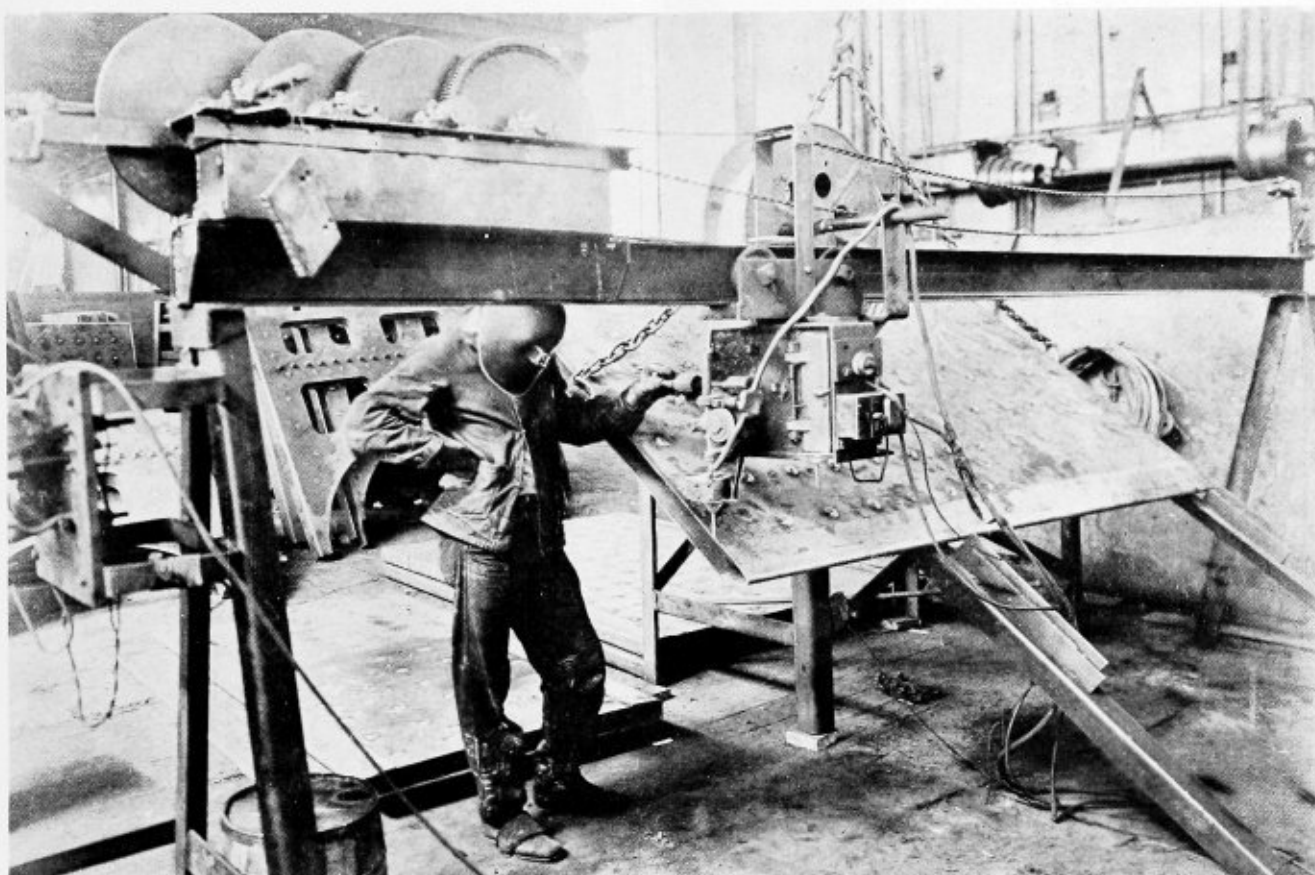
Welder used for making cap welds on $\frac{1}{4}$ inch side sheets of boiler
